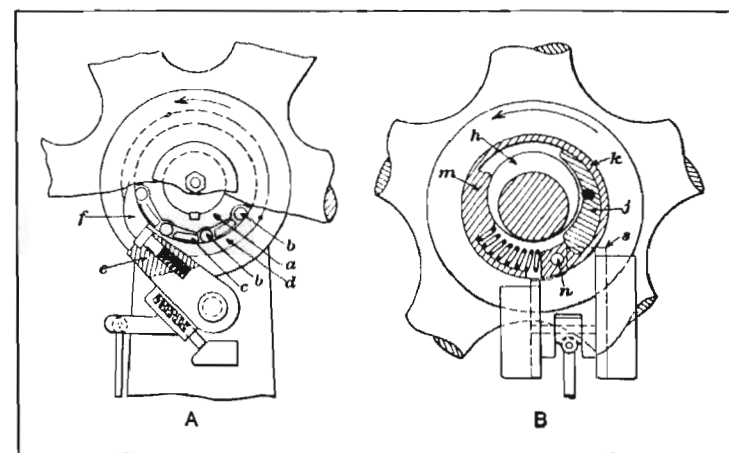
Automatic Clutches of the Cam or Wedging Type
